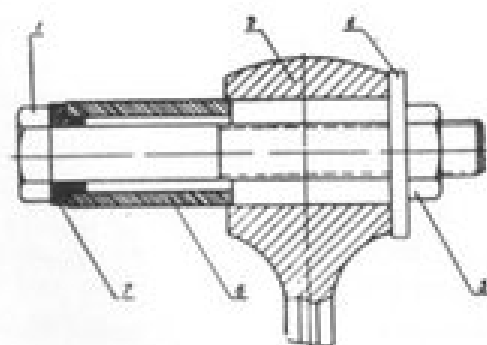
Pressing-in the connecting rod small end bush by device:
